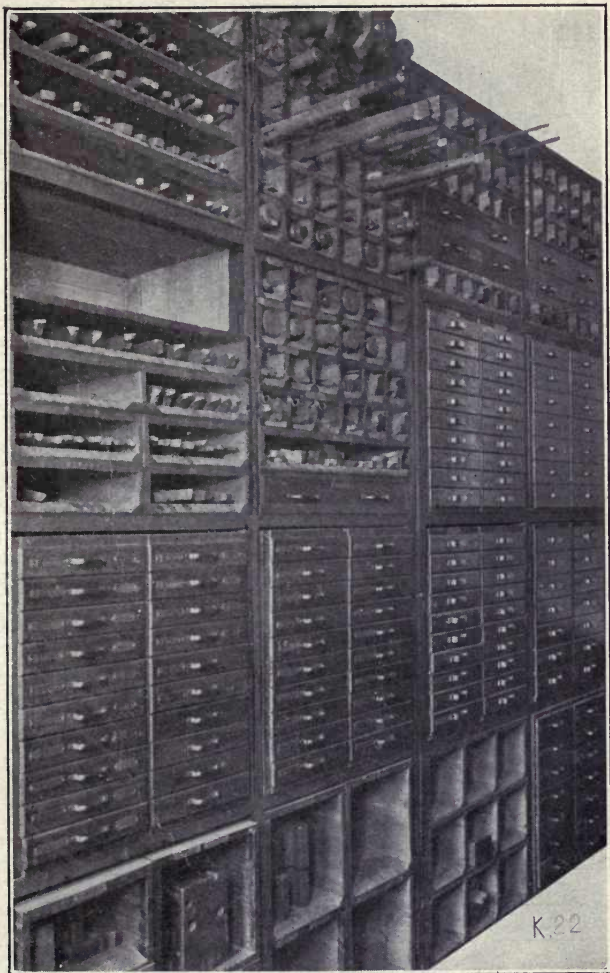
SECTIONAL RACKS FOR ARBORS, BORING BARS, CUTTING TOOLS, ETC.
